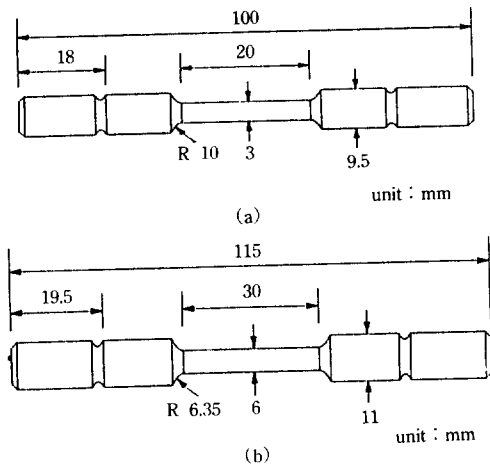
Specification of SSRT specimens of HY-130 steel. (a) base metal (b) weld metal
